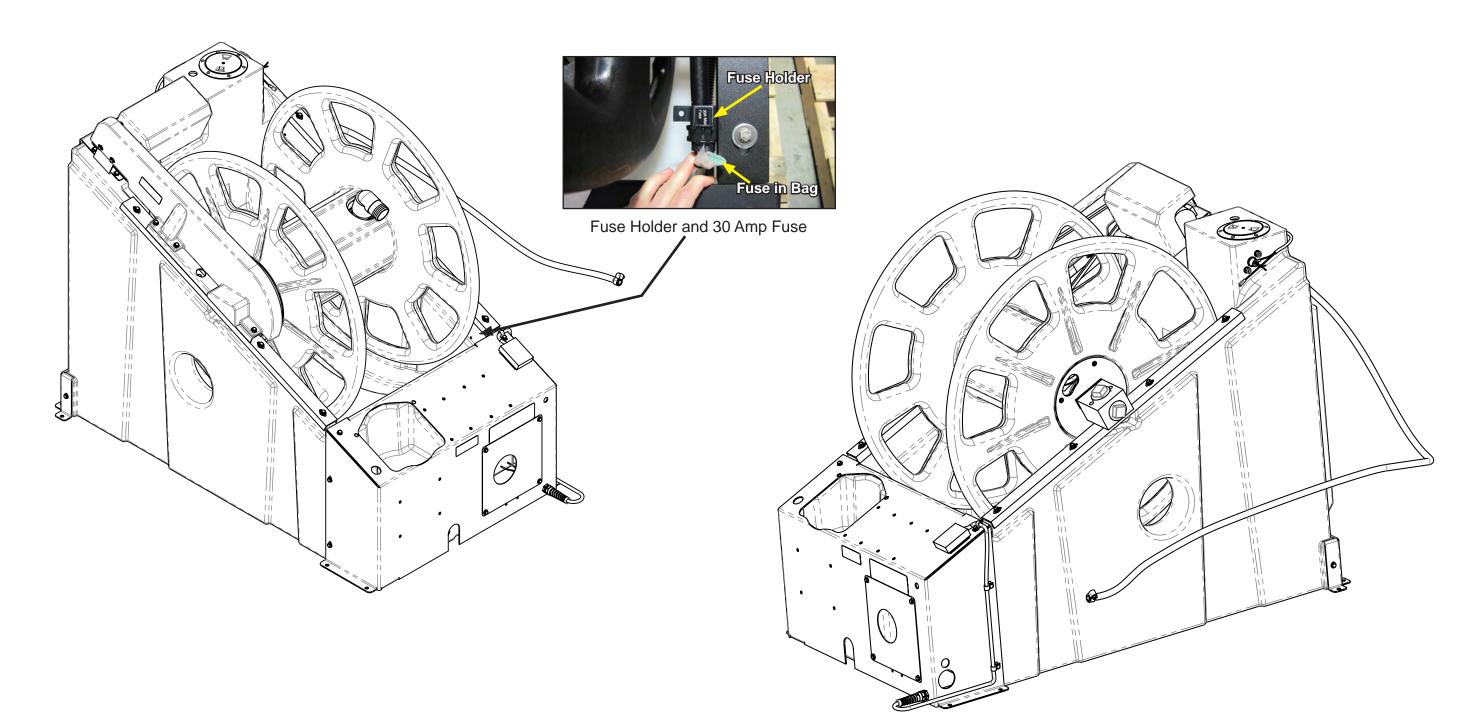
HydraCradle Tank Assembly - View 4 of 4 000-163-609 Rev. D
